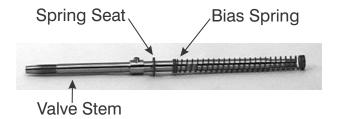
Place Bias Spring and Spring Seat on Valve Stem.
